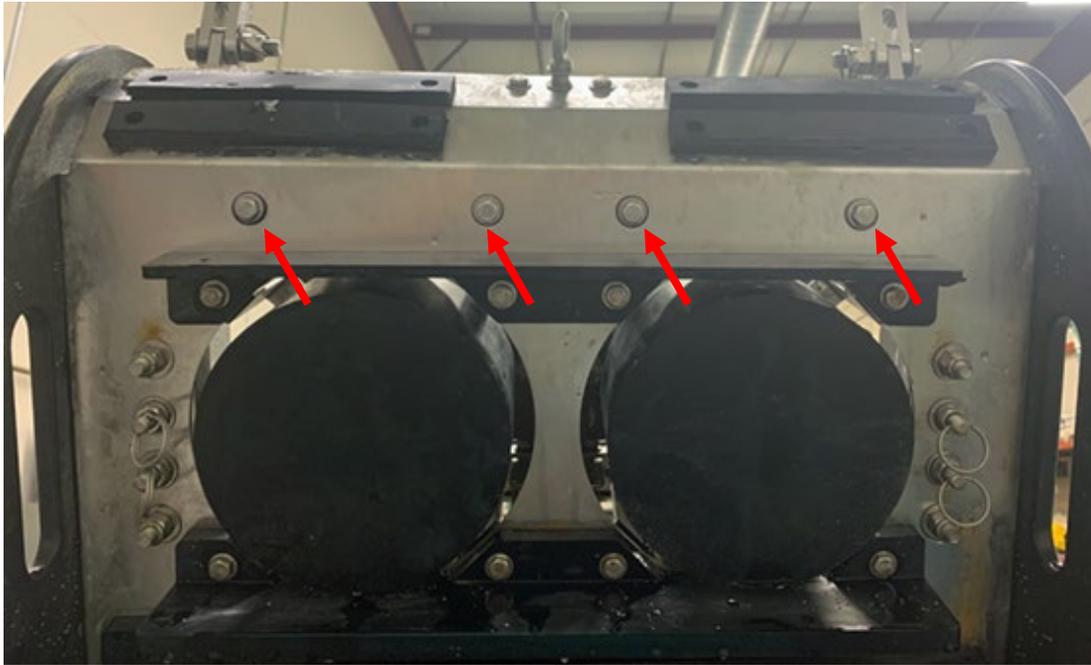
3400 Pole Mount Instruction - Weight Removal-Location of Bolt Heads on Bottom of Vehicle
